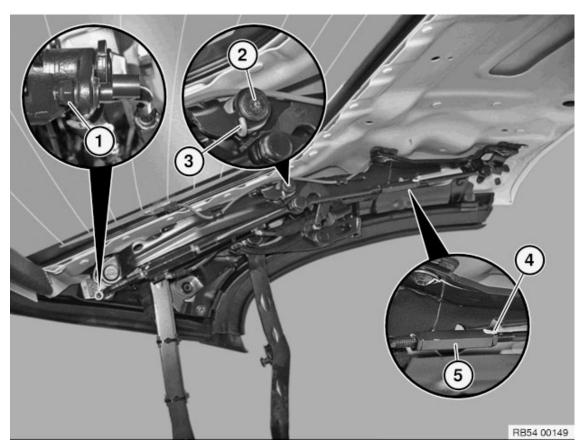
Removing Control Rod Courtesy of BMW OF NORTH AMERICA, INC.
